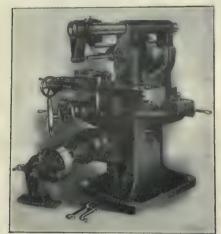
Plain Milling Machine, Grand Rapids Machine Co.
